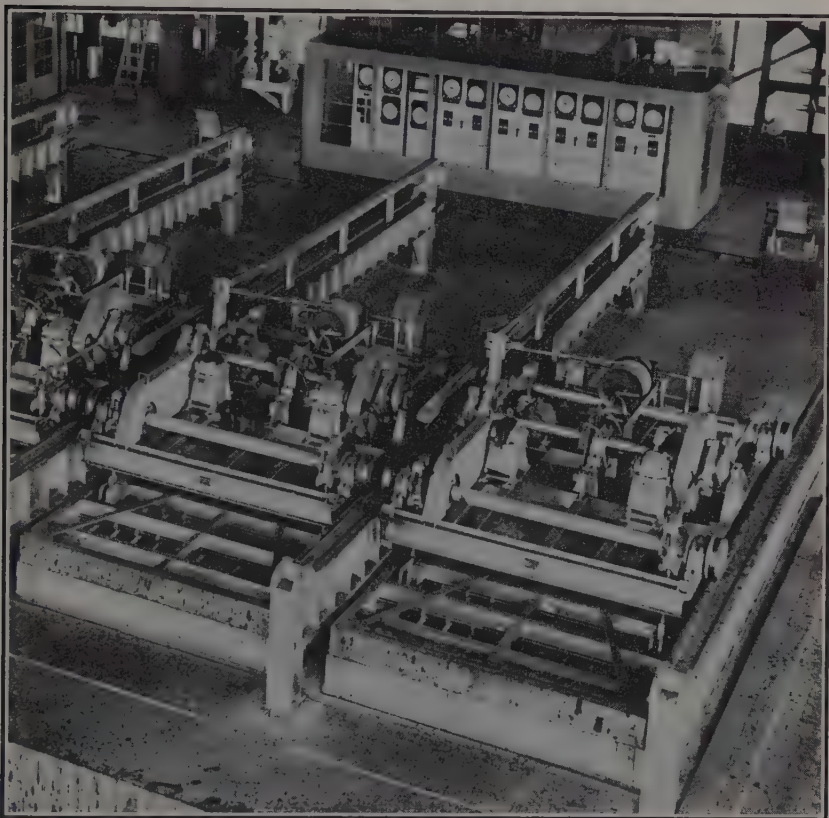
Covers of soaking pits. Courtesy of Surface Combustion Corp.
